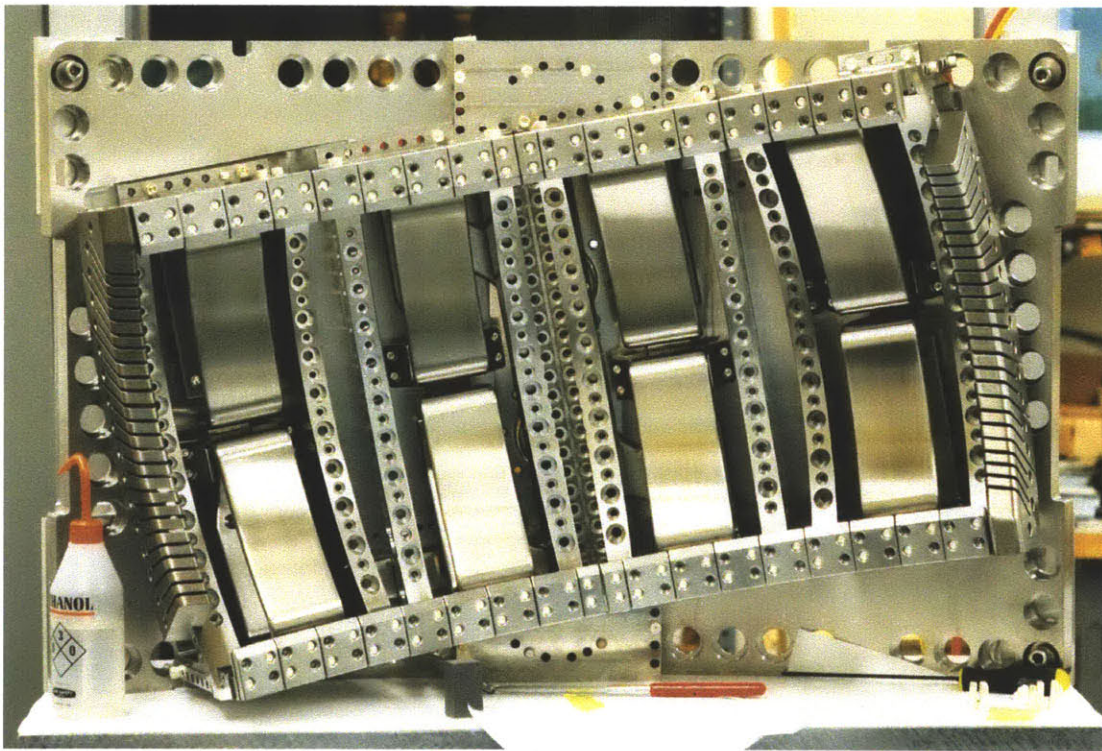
The entire antenna structure was assembled on a custom test stand to check alignment and overall part specifications. This image was taken immediately after the parts were machined, before plating and baking.
